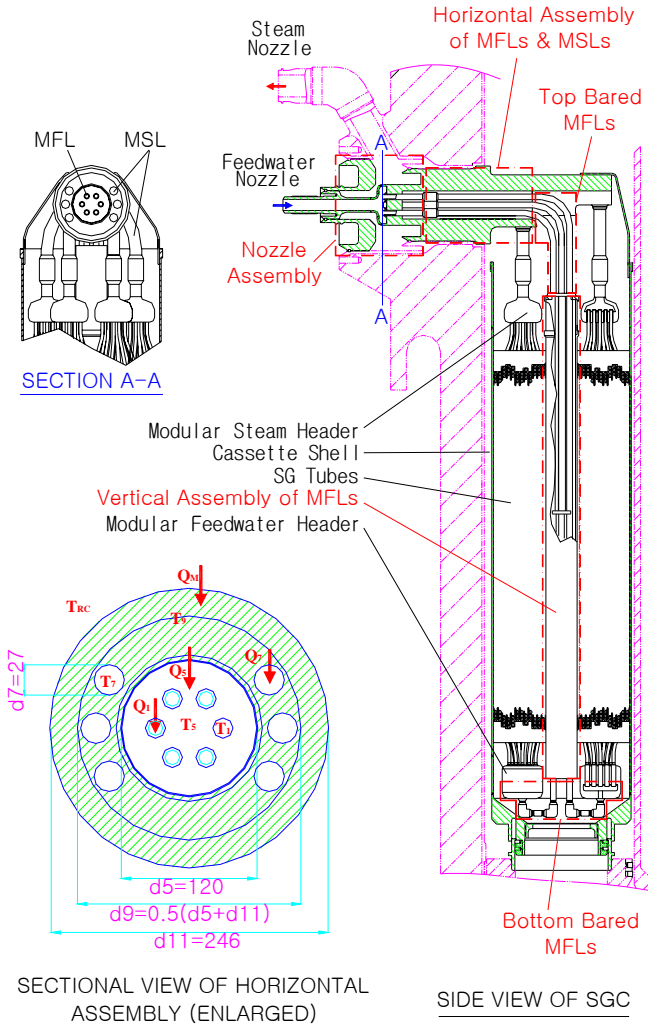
The SGC with a Sectional View of the Horizontal Assembly of the MFLs and MSLs
